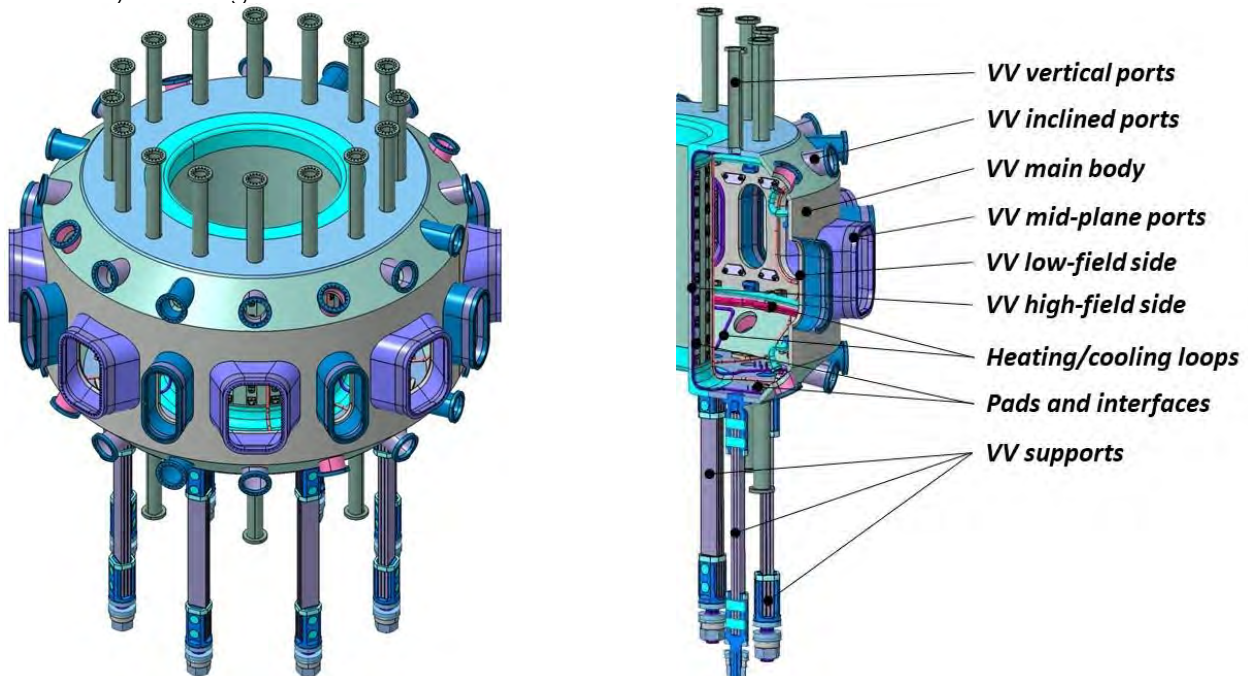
Left: Overview of the VV assembly. Right: Section of the VV assembly showing its main components
